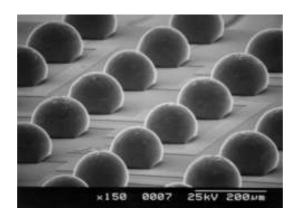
Reflowed solder bump on electroless nickel-gold UBM. (Source: http://www.flipchips.com)
